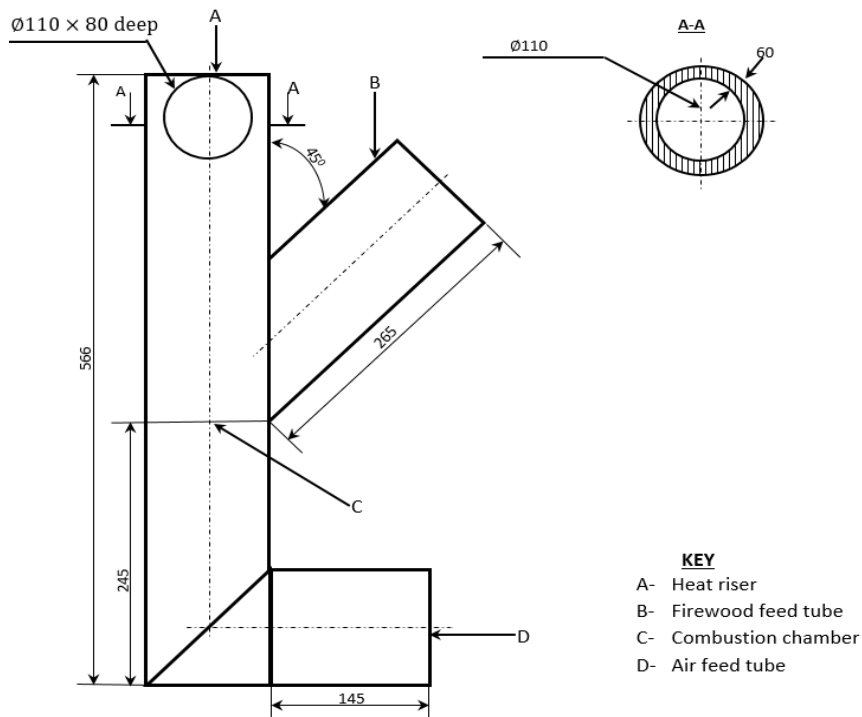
Sketch of cylindrical rocket stove, prototype 2
